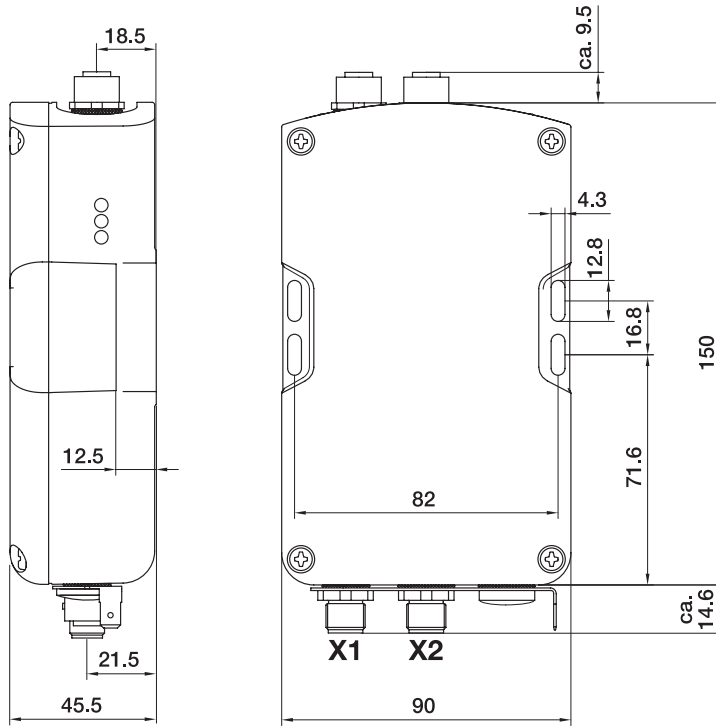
Mechanical connection BIS M-6000-007-050-00-ST15 (dimensions in mm)
